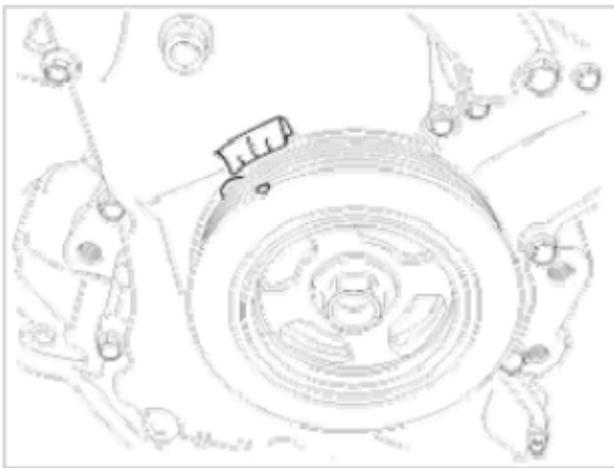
Aligning Crankshaft Pulley Groove With Timing Mark "T" Of Lower Timing Chain Cover
